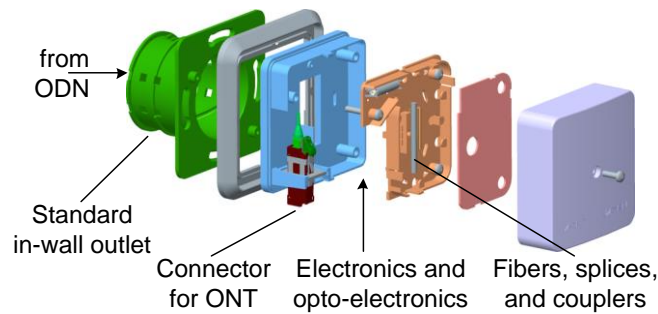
Exploded view of a housing for a battery powered DD. The optical components like fibers, splices, and couplers are separated from the electronics (not shown) in the housing. The housing is attached to a standard flush-mounted wall outlet. The housing also includes an optical standard E2000 connector for attaching the ONT.
